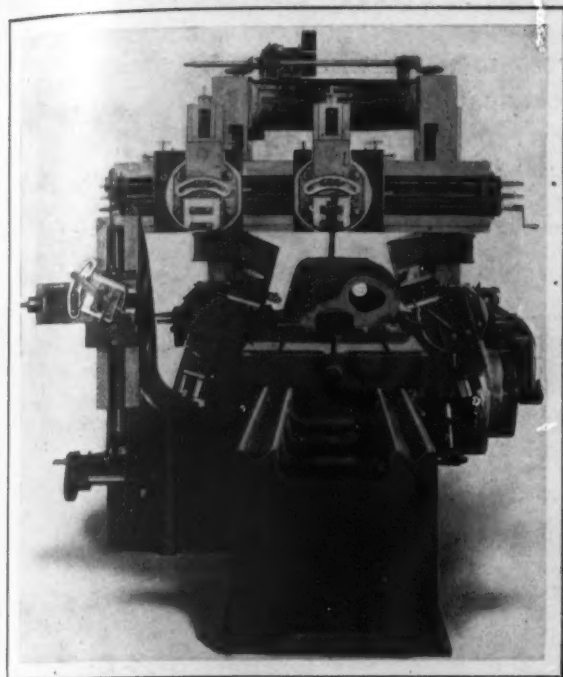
An End View of the Machine Showing the Arrangement of the Various Heads
